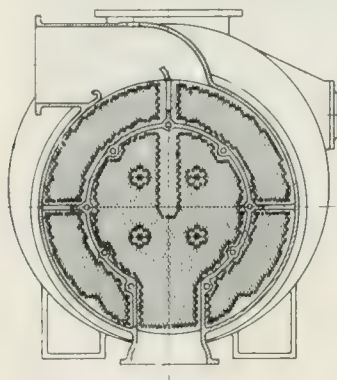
SECTION OF SURFACE CONDENSER SHOWING STANDARD ARRANGEMENT OF TUBES
